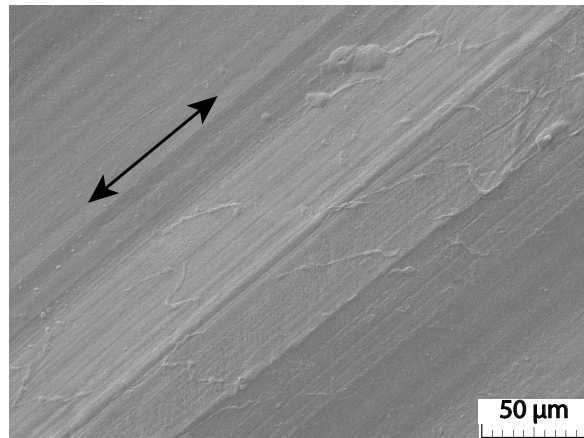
Example of surface profile where discontinuous chip was formed without evident cracking. Machined from a room temperature workpiece using a tool with -20° rake angle, highly worn tool, $155\ \text{m}/\text{min}$ cutting speed, $0.06\ \text{mm}/\text{rev}$ depth of cut.
